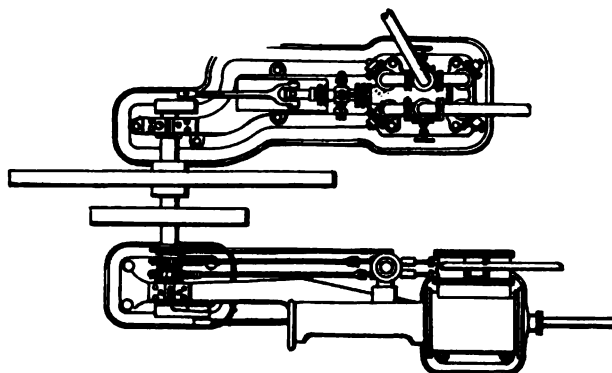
PLAN OF LINDE COMPRESSOR AND ENGINE.
